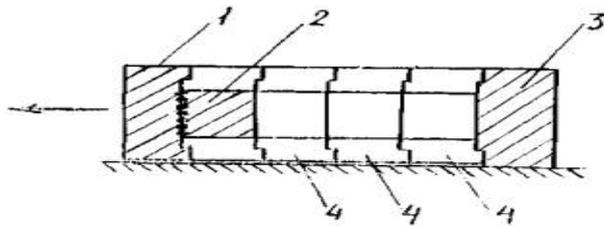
Diagram of manufacturing hollow support blocks:
